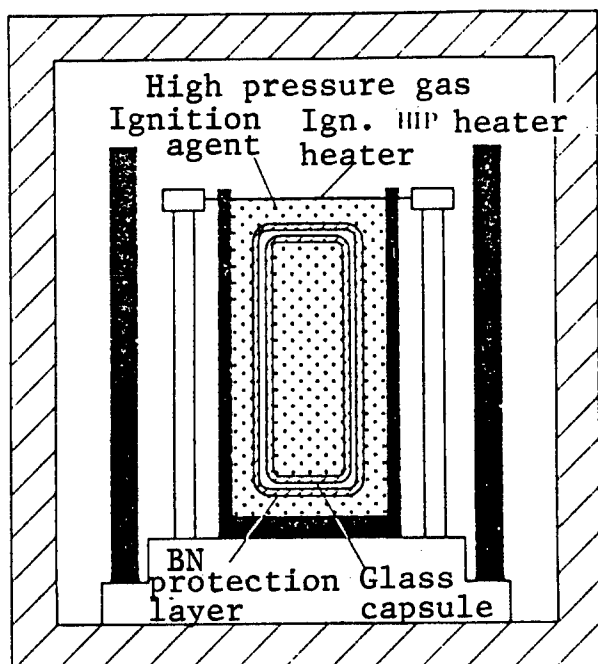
Gas Pressure Combustion-Sintering Test Equipment
